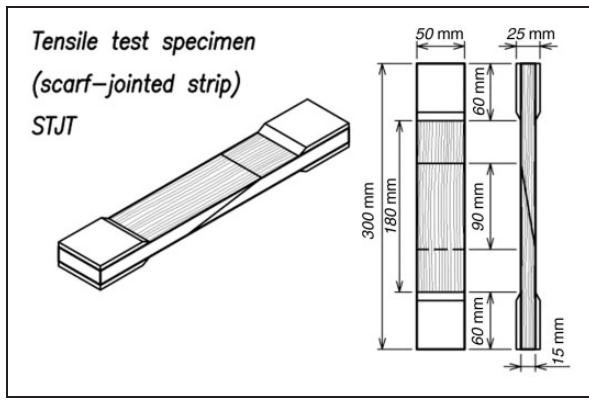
Tensile test specimen geometry (scarf-jointed strip).
